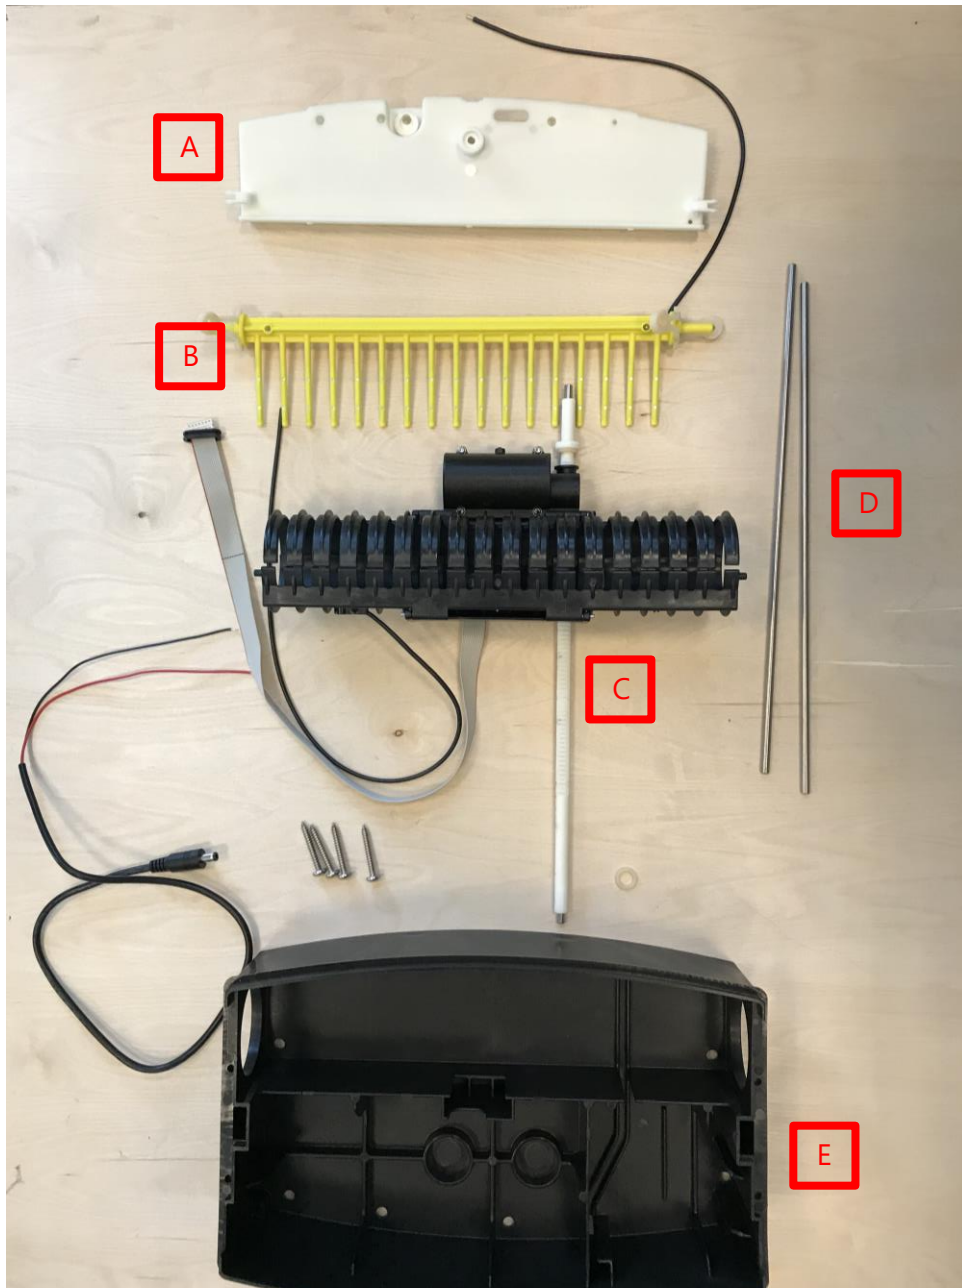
Box disassembled. A) The top of the elevator. B) Rake for applying high voltage through elevator tunnel. C) Elevator tunnel seen from the front, mounted on shaft with motor. D) Elevator guide poles. E) Bottom of box seen from above.
